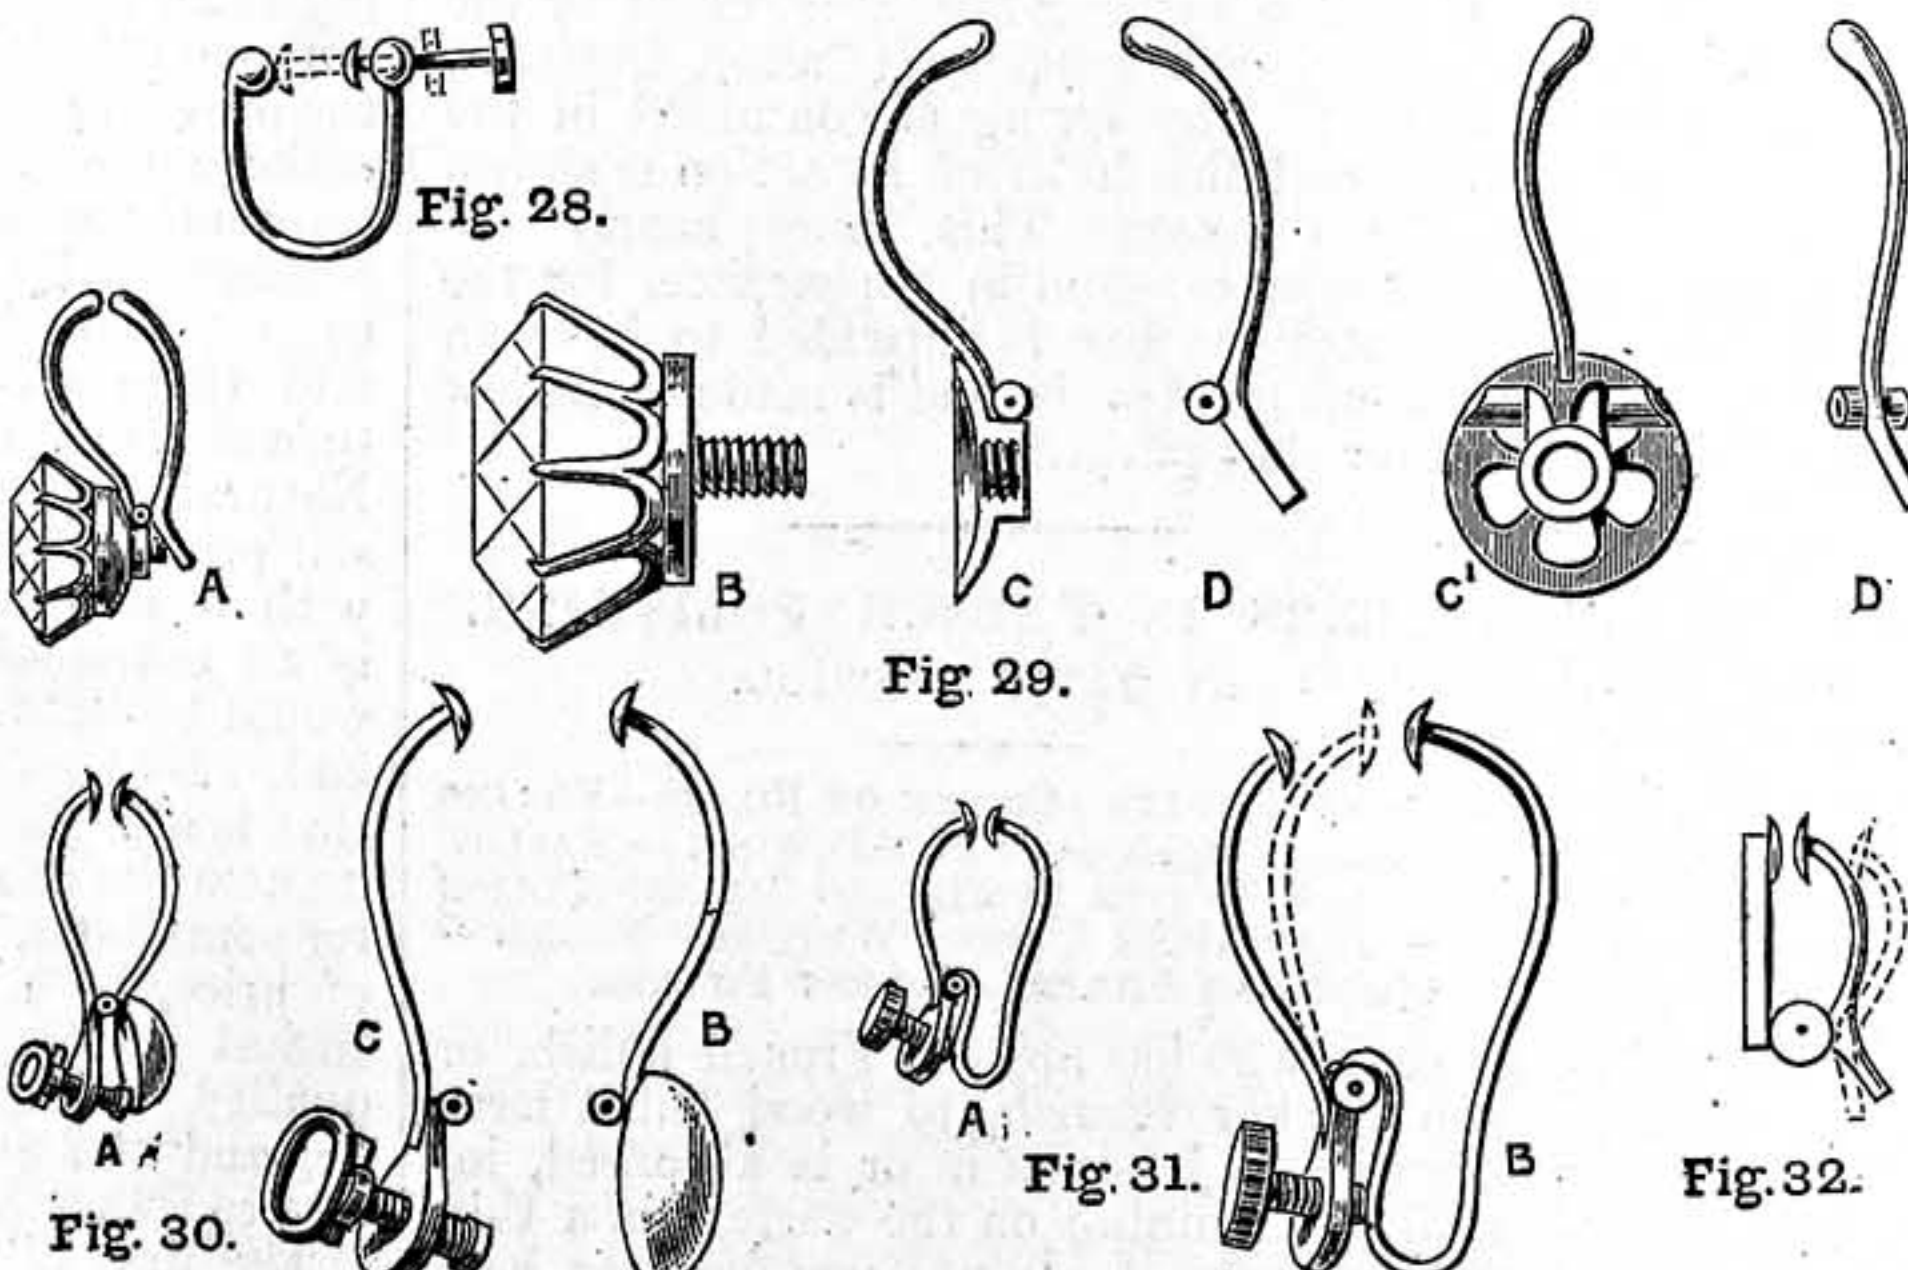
Simplest method of attaching an Ear-Ring to Unpierced Ears, the Ornament to swing or be soldered on to the Front.
